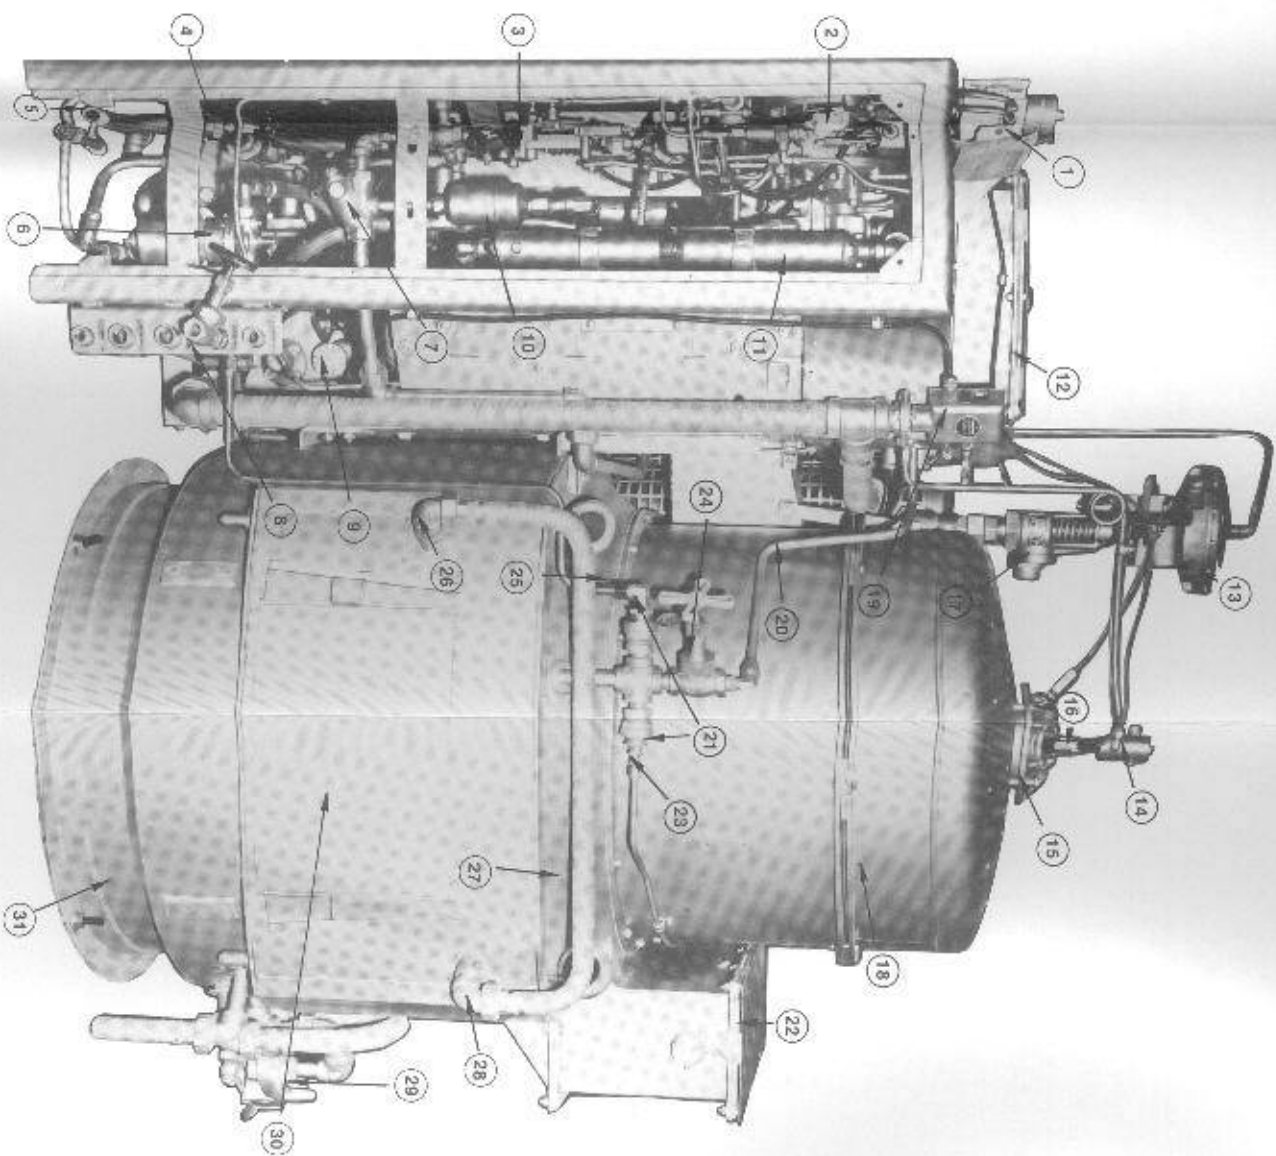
OK-4625 LEFT-HAND STEAM GENERATOR (RIGHT SIDE VIEW)
